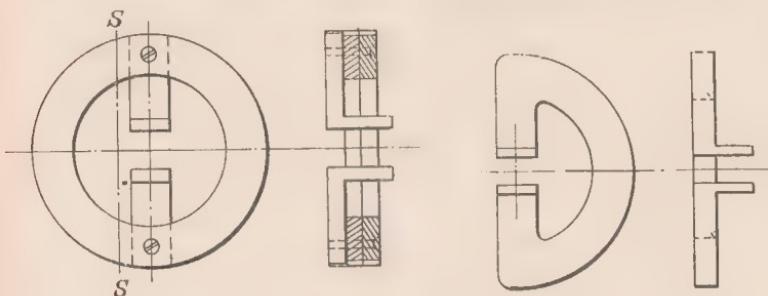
Compound Ring Type Magnet and Simple Semi-circular Magnet.
